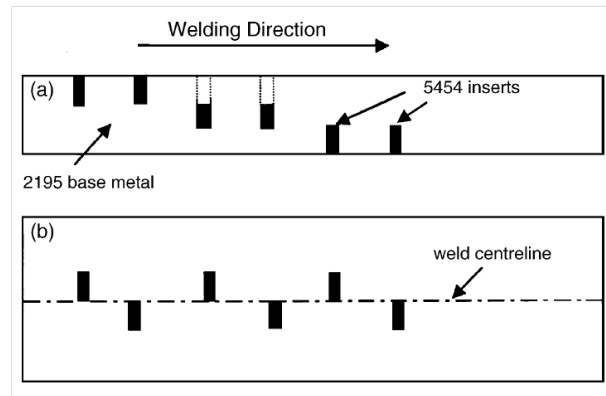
Positions of the marker inserts along the weld [MM05]
